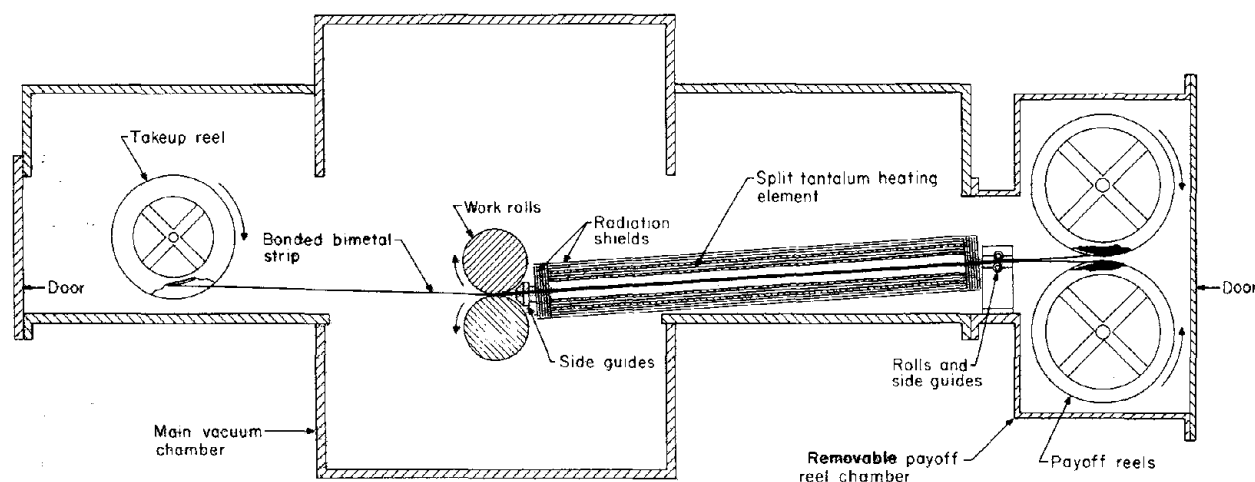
General arrangement of continuous strip vacuum rolling mill.
